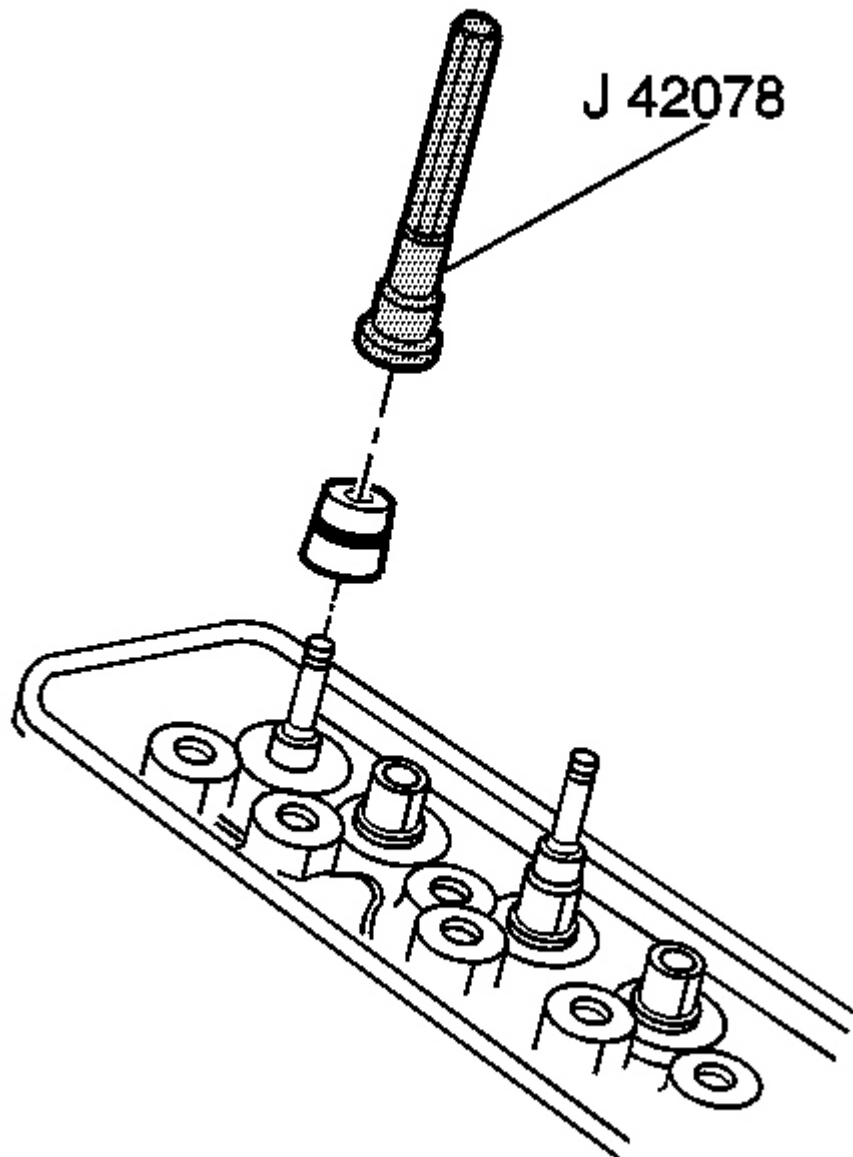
J 42078, Valve Stem Oil Seal & Bolt
